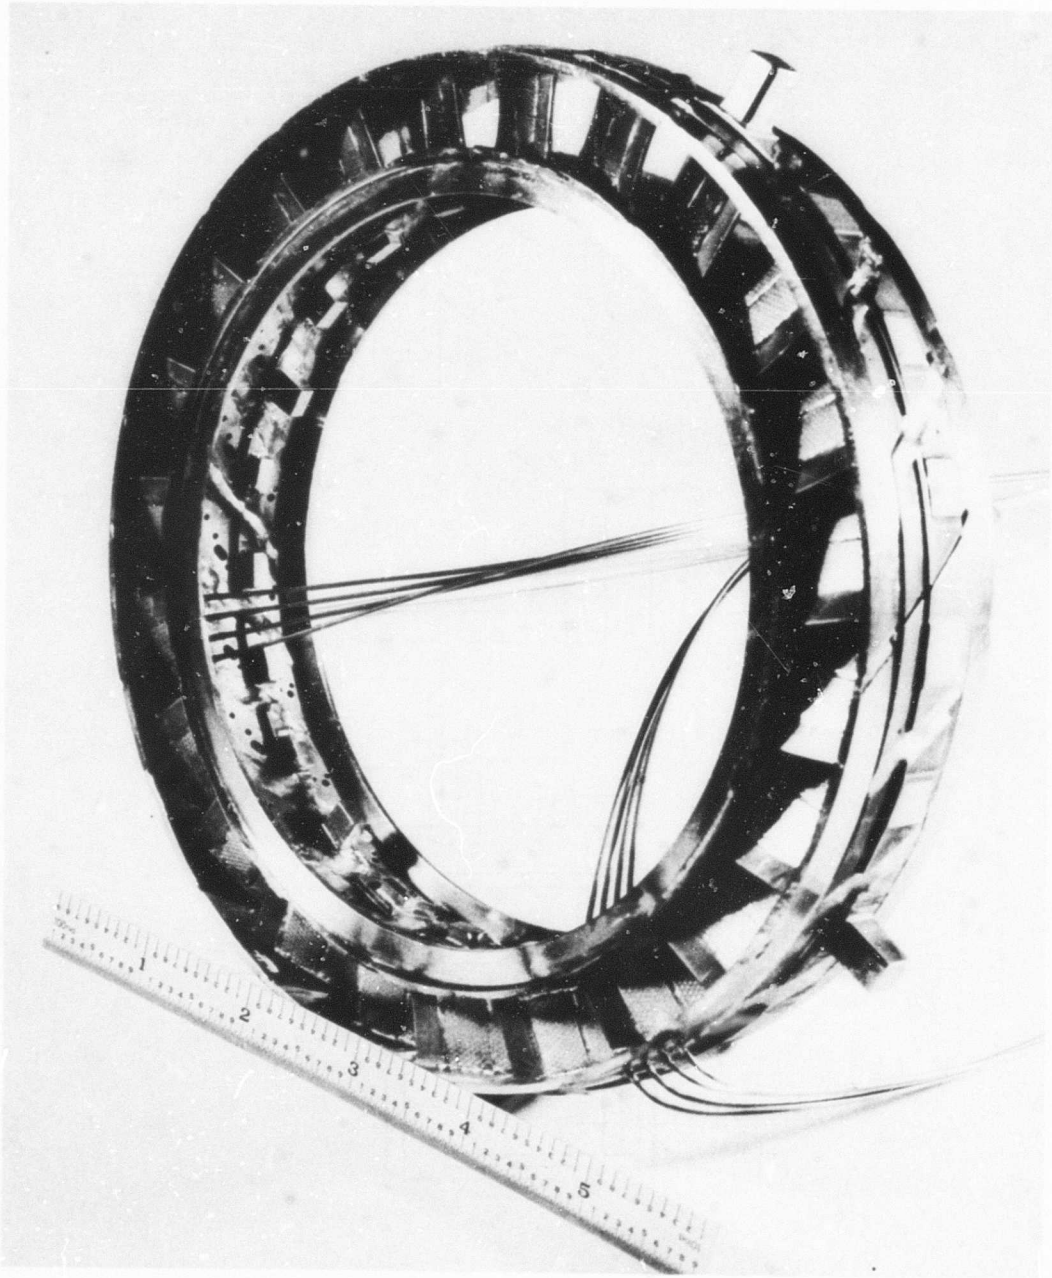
Second Welded Stator Assembly - Rear View Showing Static Pressure Instrumentation.
